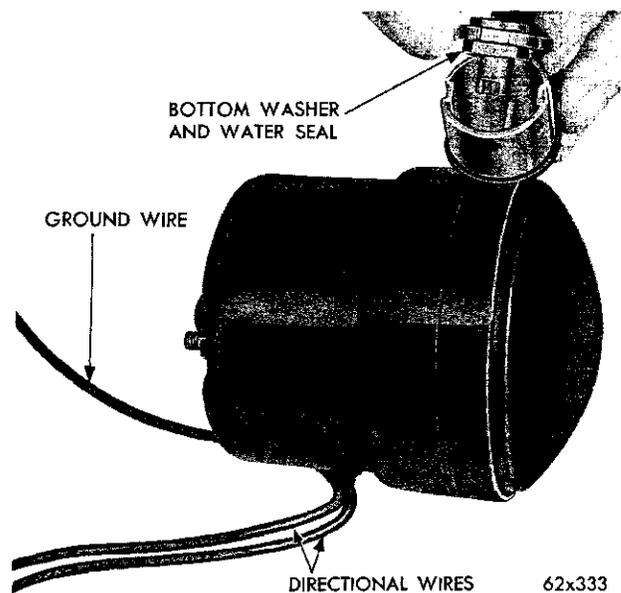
Removing Bottom Insulator and Water Seal Washer
